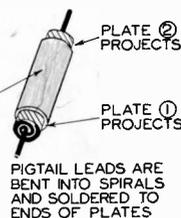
C. The projecting ends of the plates are compressed and pigtail leads soldered to each.
